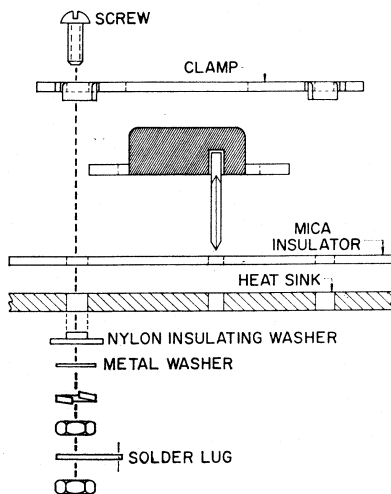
Suggested mounting arrangement for transistors in JEDEC TO-3 package.
